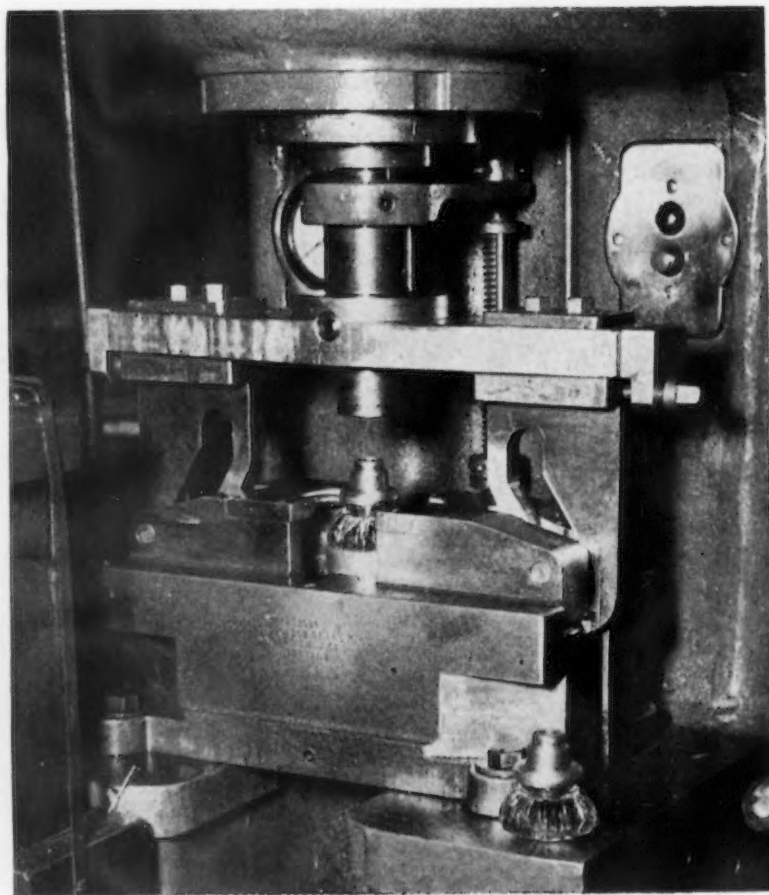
Dennison hydraulic press setup with cam-operated die employed for closing a drawn brass scalp around a glass knob bead. A finished knob is shown below the die.
